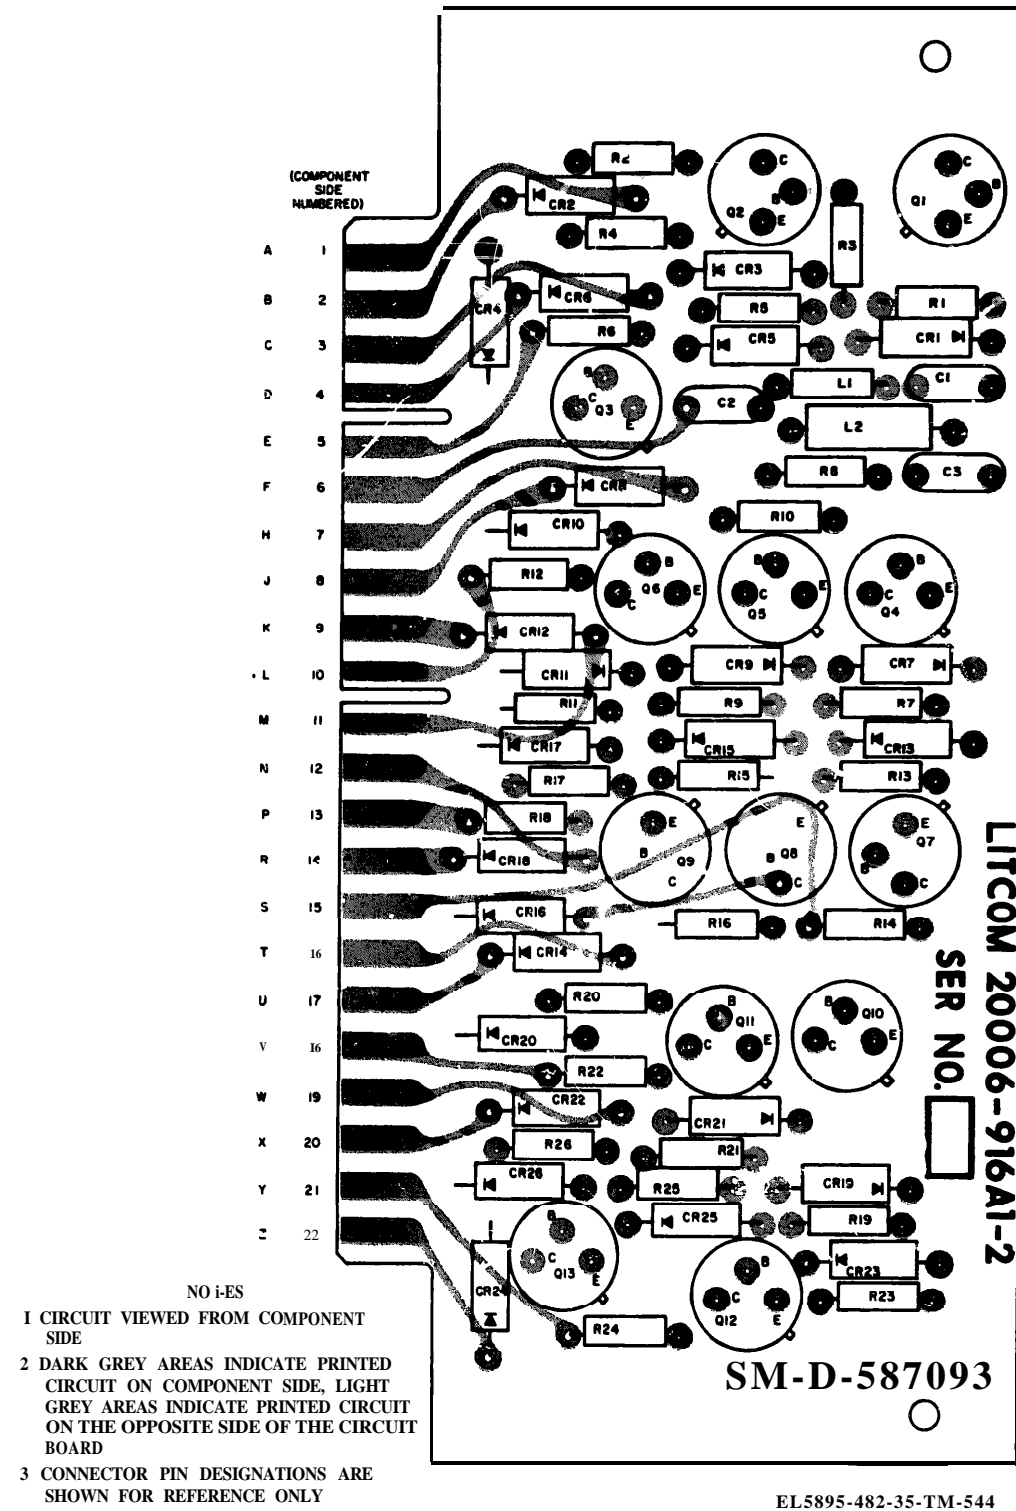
Remote control switching A9, A10, and A11, wiring diagram and parts location
